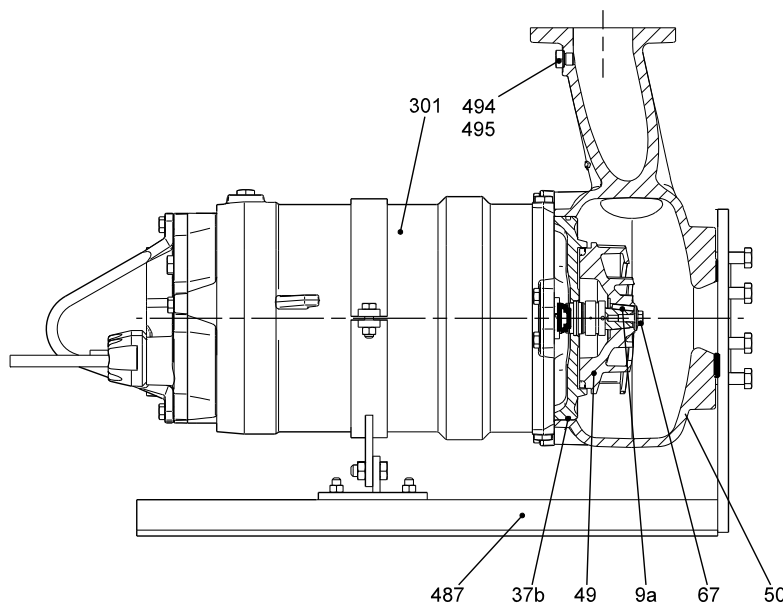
Installation type H, dry, horizontal pump on base stand - SuperVortex impeller
